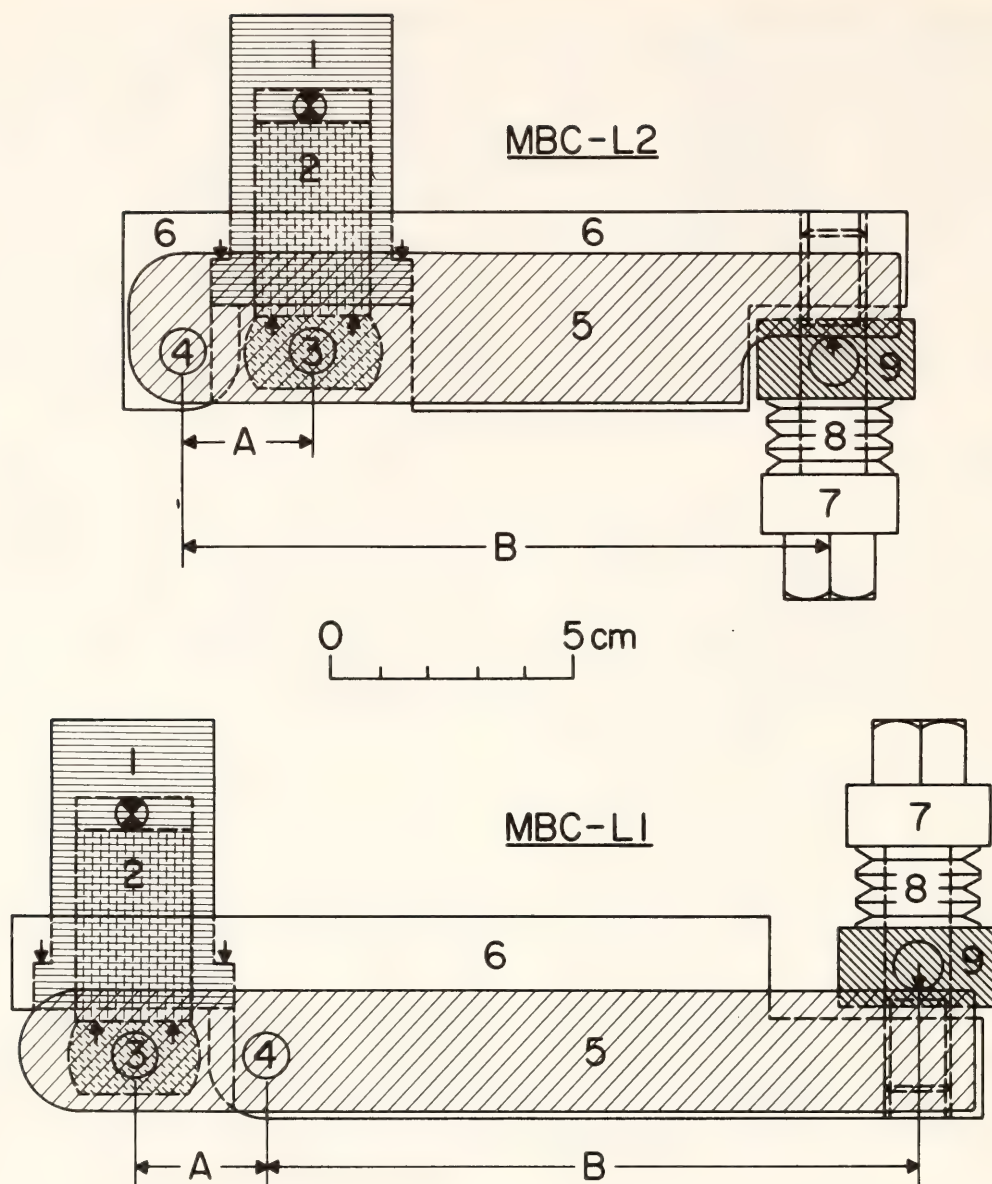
Lever-arm assembly: 1, cylinder; 2, piston; 3, thrust block; 4, fulcrum; 5, lever arms; 6, main body; 7, bolt; 8, Belleville spring washers; 9, spring holder.
